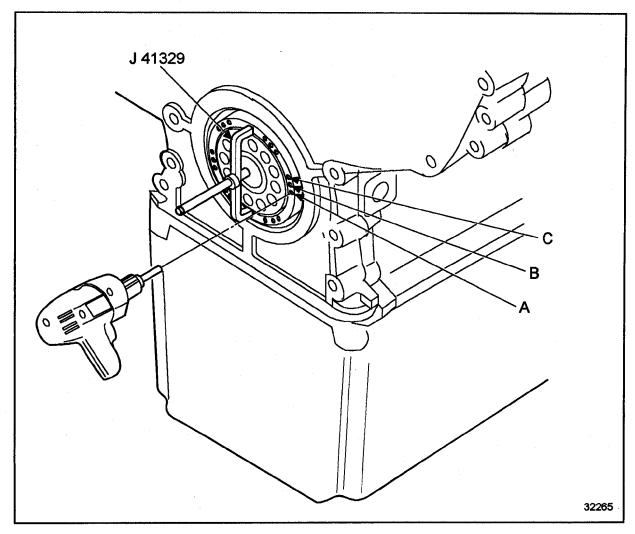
Removing Front Crankshaft Oil Seal from Gear Case Cover
